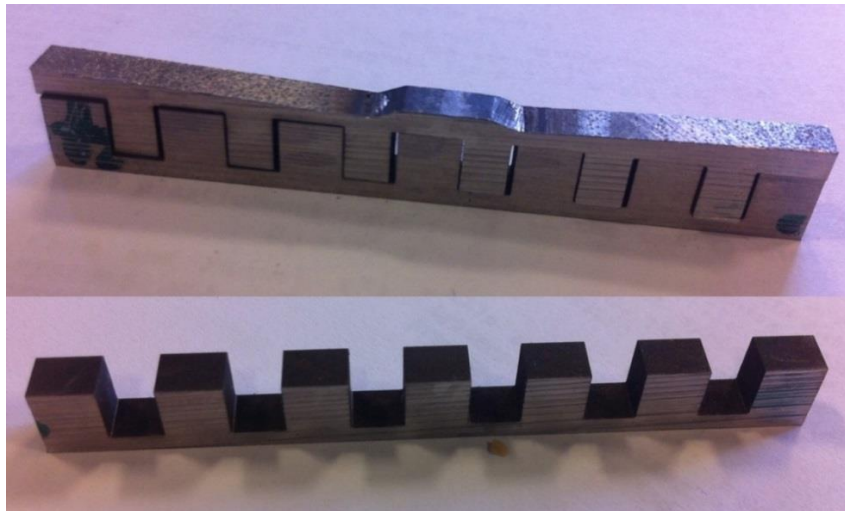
Electrical discharge machining (EDM) of (d_0)
